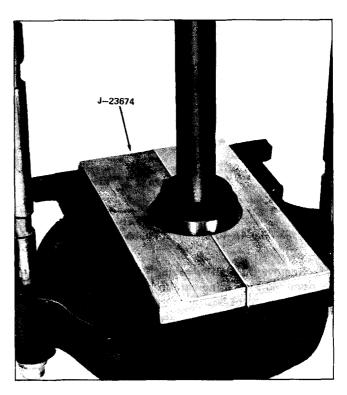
A-13 Pressing Off Axle Bearing (B Series)
